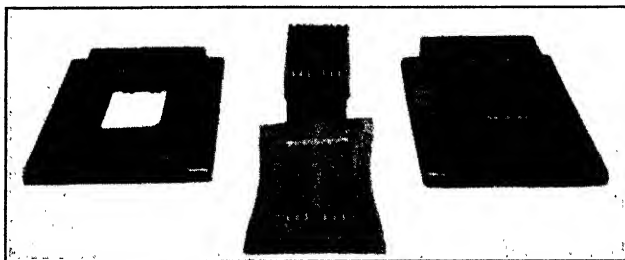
A triple-action die for producing a two-draw stamping in a double-action press with an auxiliary drawing attachment under the bed.
